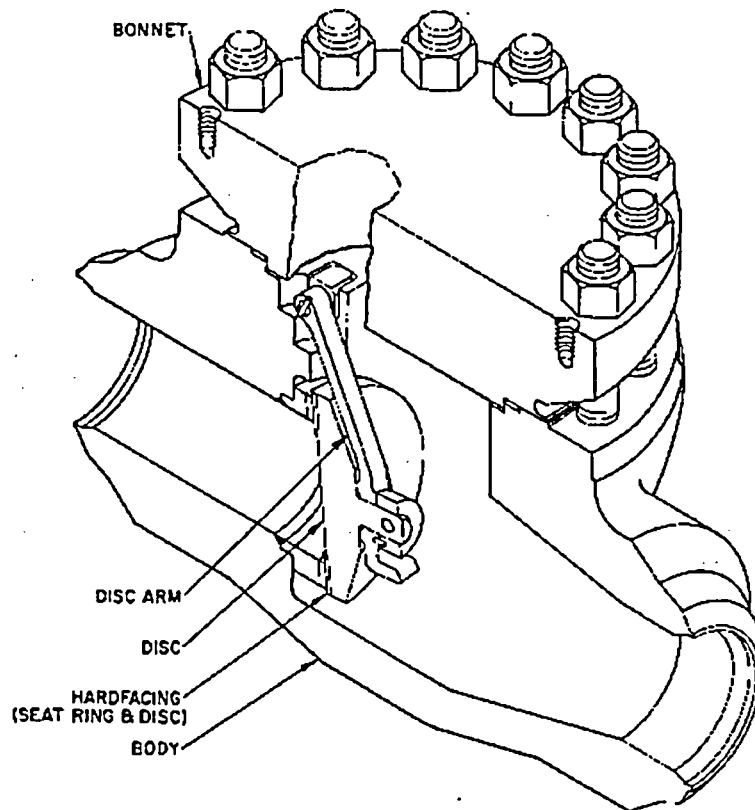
Westinghouse Style A Swing Check Valve Models 03000CS88 and 04000CS88
